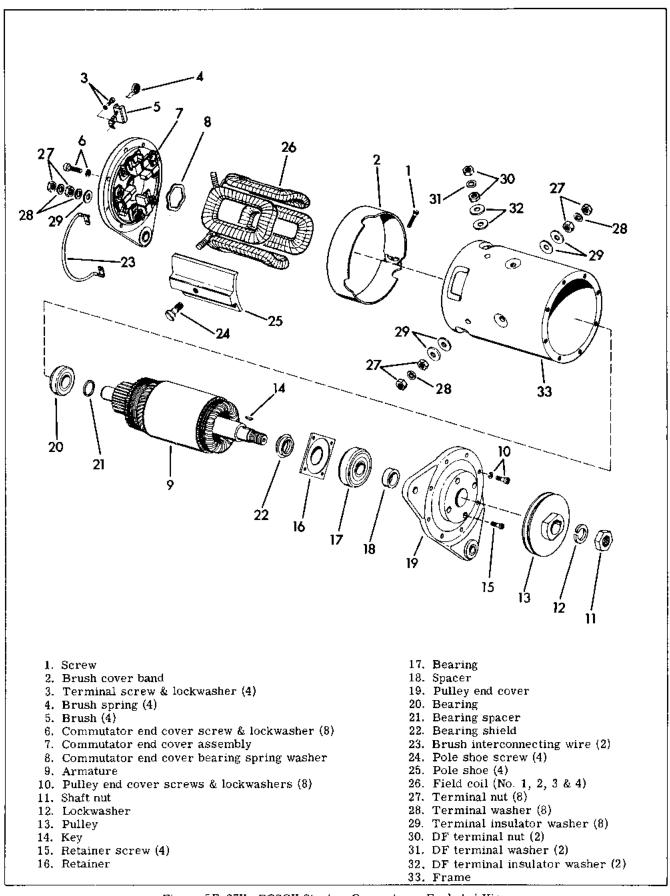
E-27H. BOSCH Starter-Generator - Exploded View
